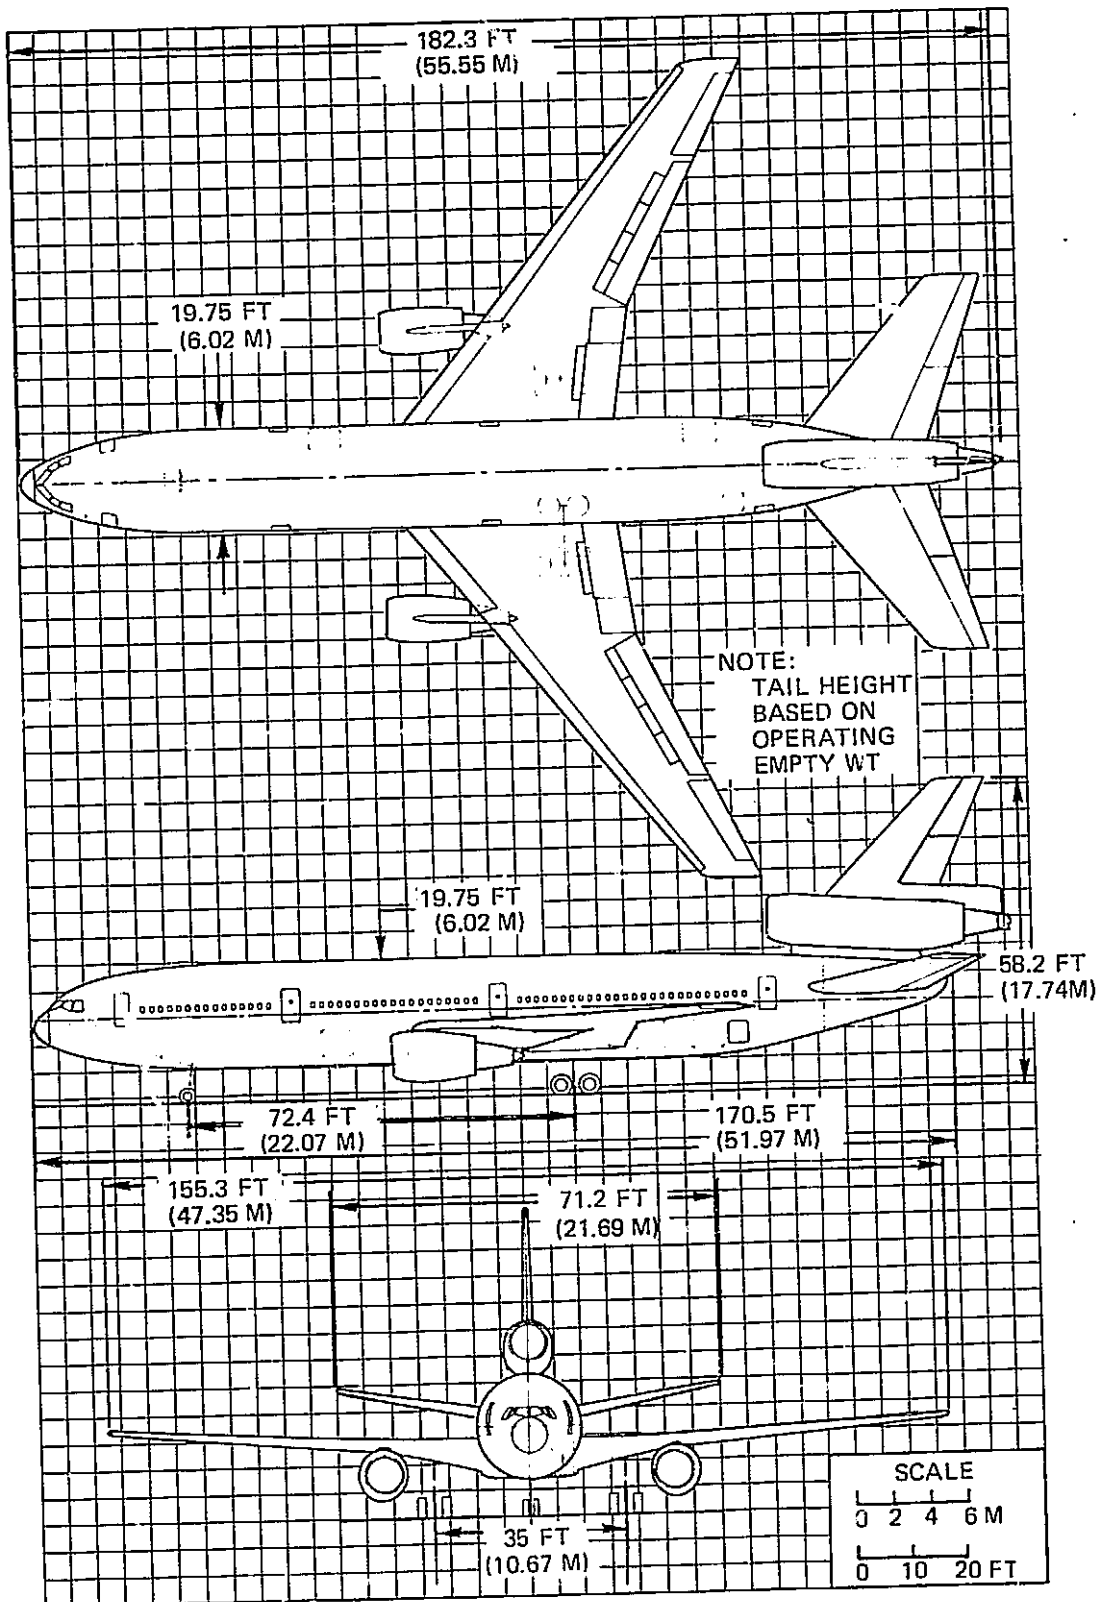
DC-10-10 GENERAL AIRPLANE DIMENSIONS
